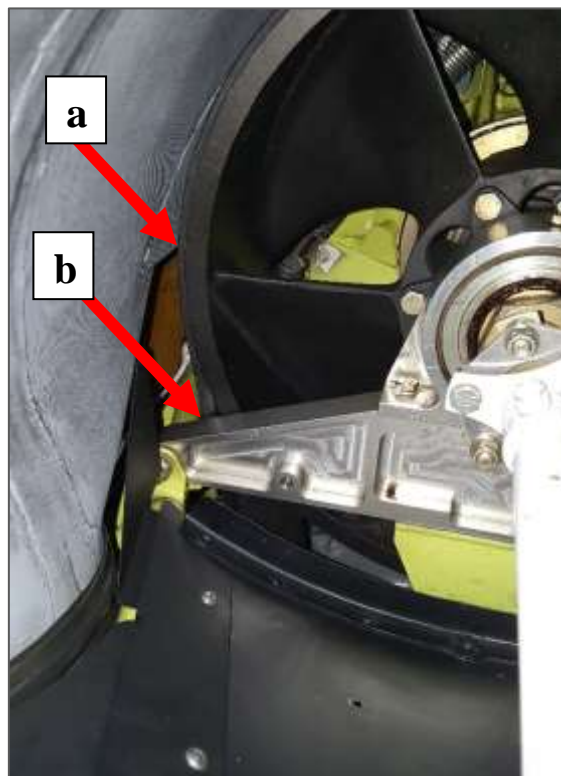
Inspection points – a) Edge of upper plenum/air inlet, left side; b) Left truss
